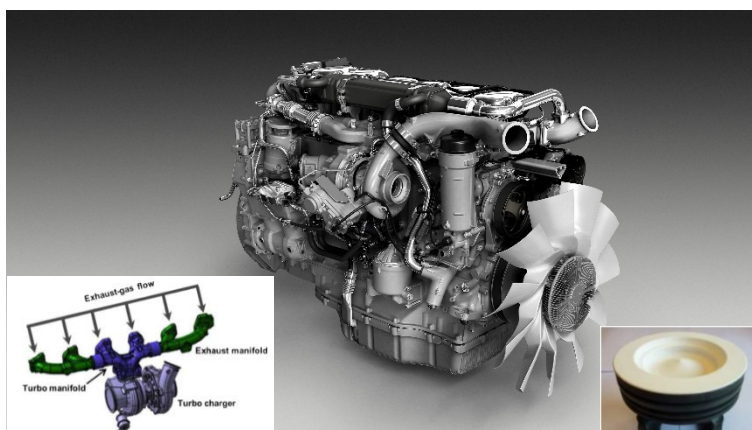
Scania D13 450/490 hp Eu6 diesel engine. The smaller images show (left) the exhaust manifolds, turbo manifolds, and a turbocharger [8] and (right) a piston with TBC [7].
